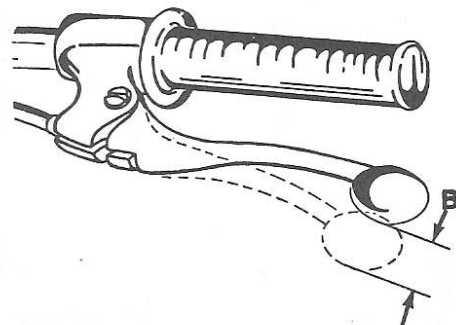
Brake lever free play (B) should be 9-15 mm (0.35-0.59 in.). Be sure to check and adjust brake pedal free play first.
